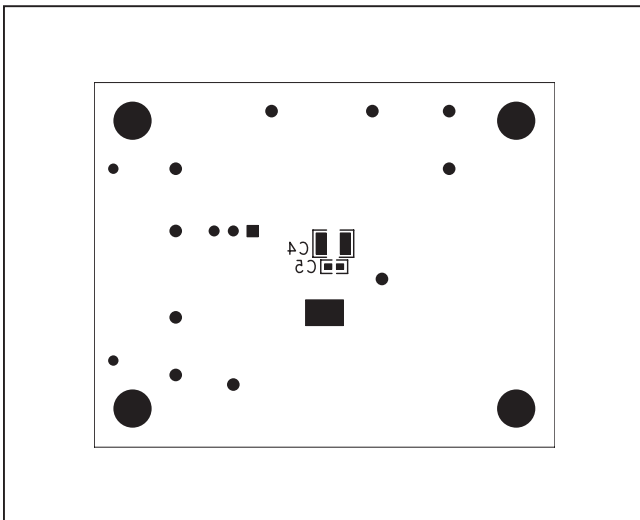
MAX16977 EV Kit Component Placement Guide—Solder Side
